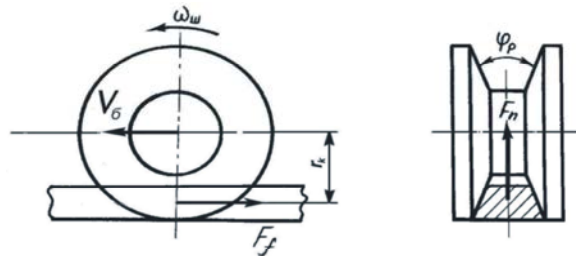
Schematic of the forces acting on the rollers, the raids to reverse rotation pad (V_σ – linear speed of the spindle drum axis spindles. φ_p – groove angle roller)
